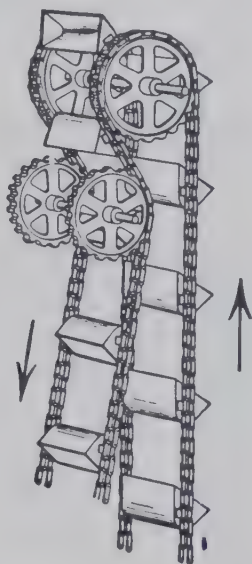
Drawing illustrating the "positive-discharge" bucket elevator. The buckets are "end-hung" between two strands of chain and are inverted as they pass over the head sprockets and behind the idler wheels, thereby effectively discharging materials not well handled by centrifugal discharge elevators. (Chain Belt Co.)
